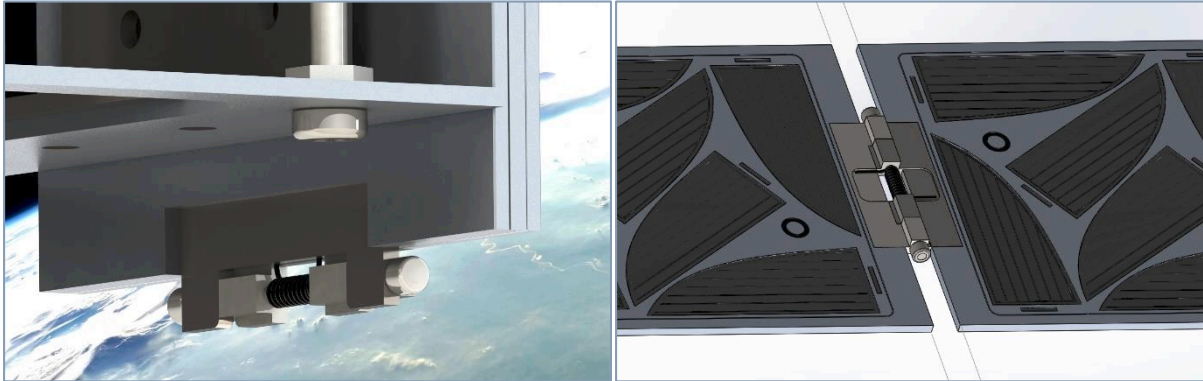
The Thin Spring Hinge at Stowed (left) and Deployed (right) States
